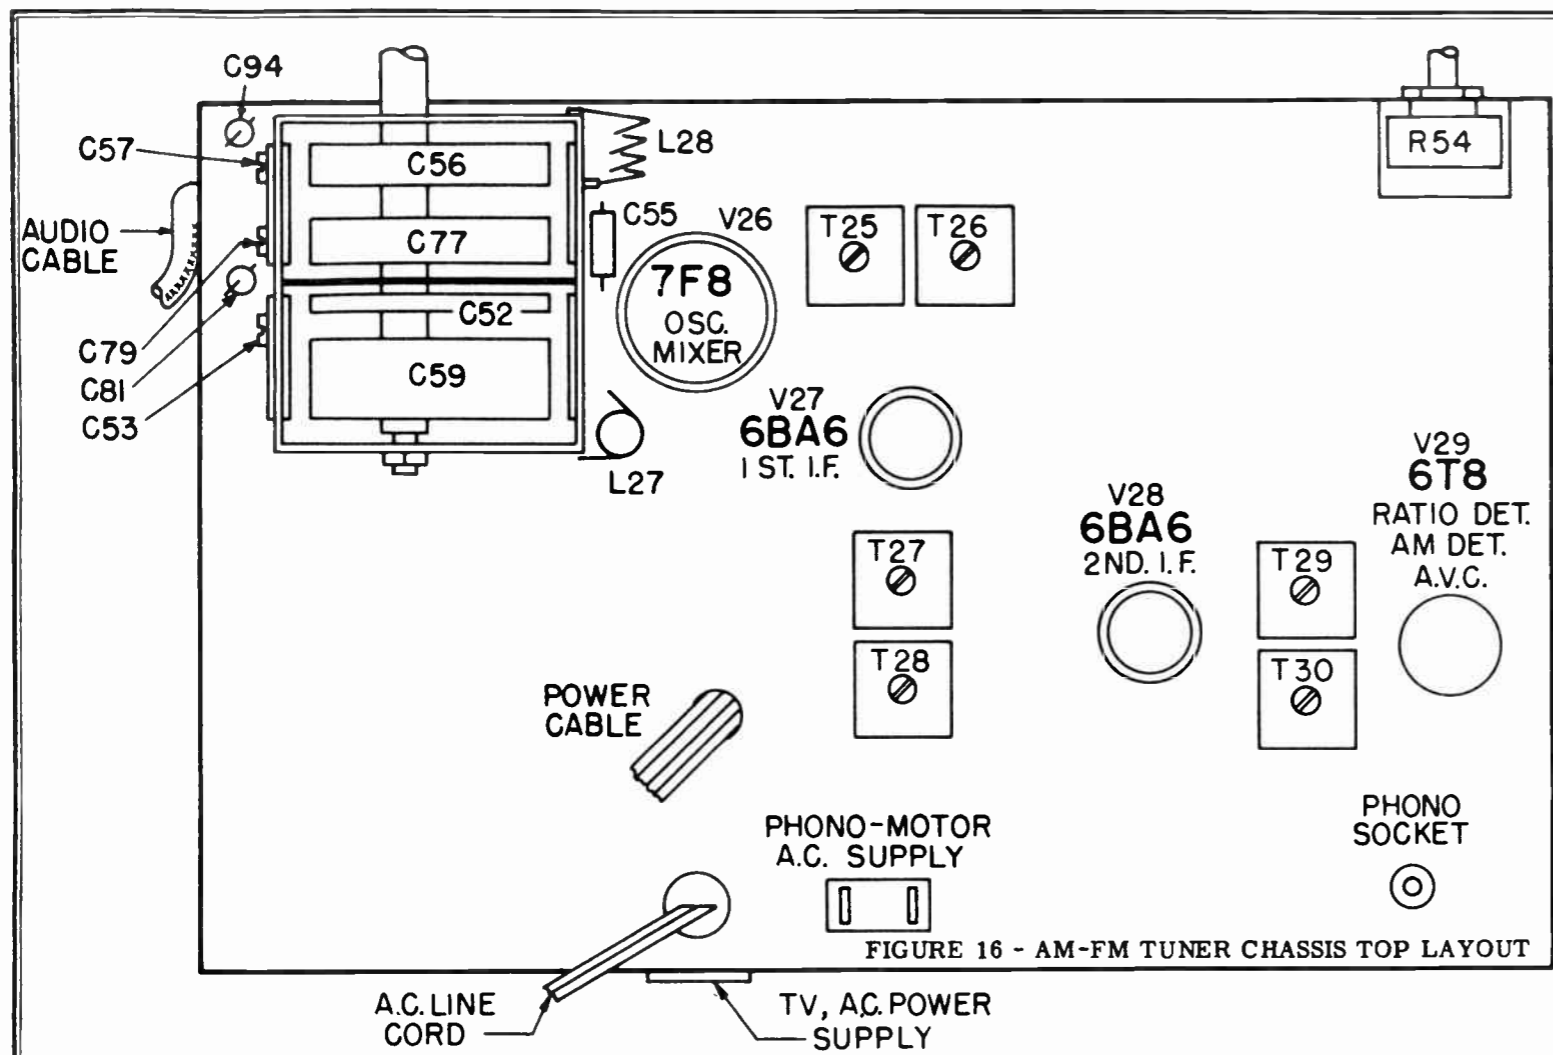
AM-FM TUNER CHASSIS TOP LAYOUT
